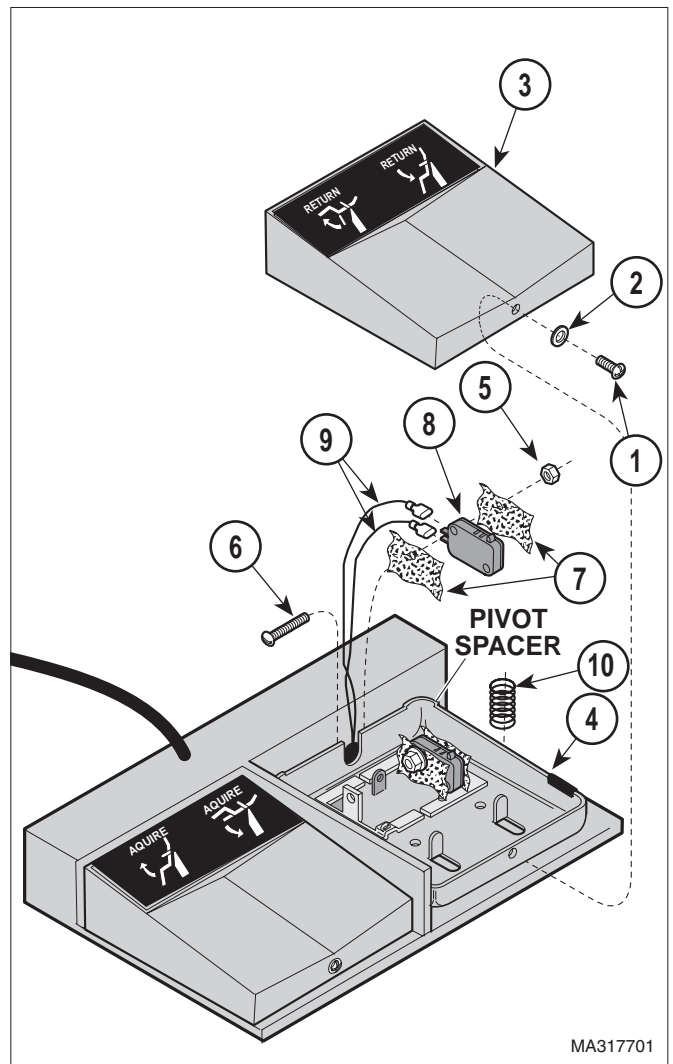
Typical Foot Pedal Footswitch Removal / Installation
